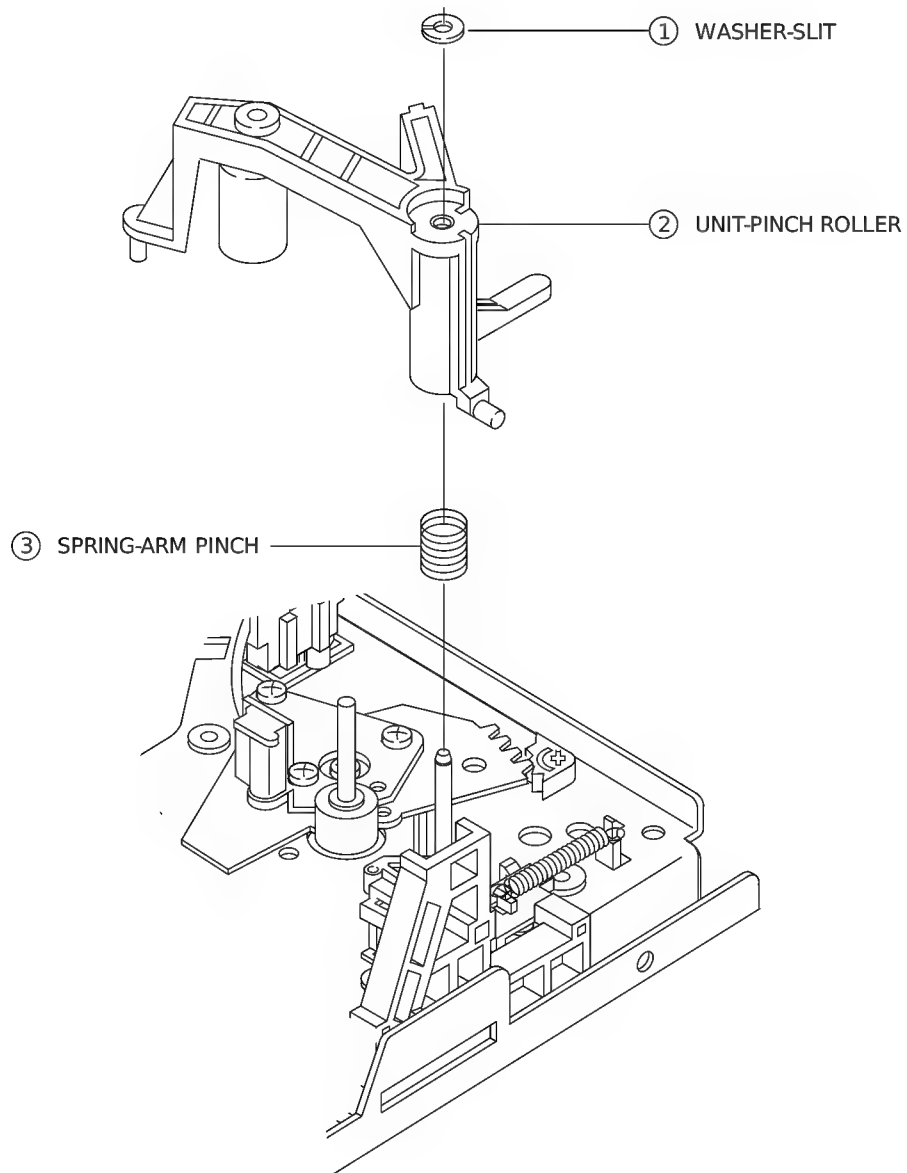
Unit Pinch Roller Ass'y Removal
